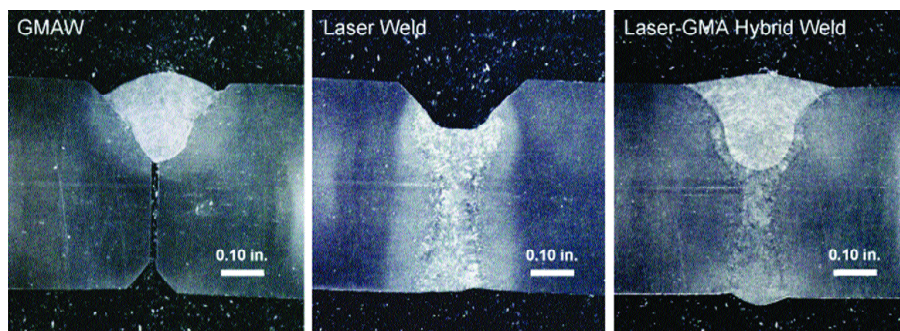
Three welds, 0.50-in. (12.7-mm) thick ASTM A-36/ABS Grade A steel plate, butt joint with 0.35-in. (8.8 mm) land and beveled with a 90-deg included angle and with an 1/8-in. (3.2-mm) chamfer at the root.
